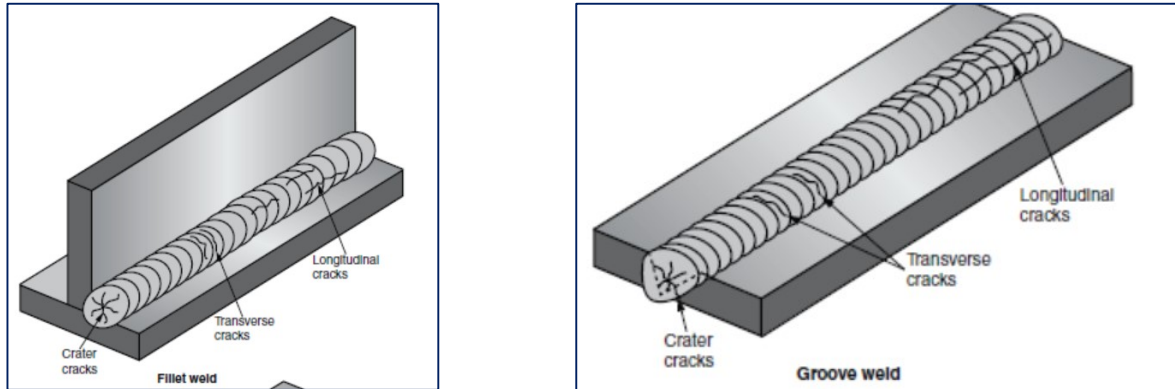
Types of cracks typical for but and fillet welded joints [111]
